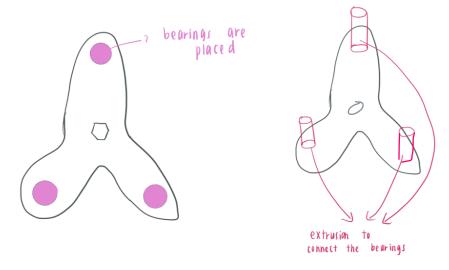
, idea 3: the left drawing is the rotor placed at the top and the right drawing is the rotor placed at the bottom with extrusions
